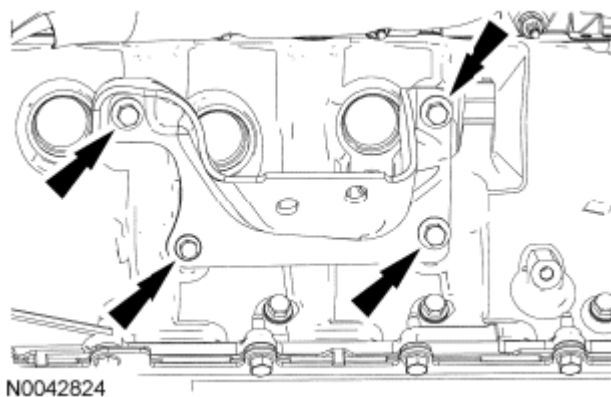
Locating RH Engine Support Insulator Bracket And Bolts
